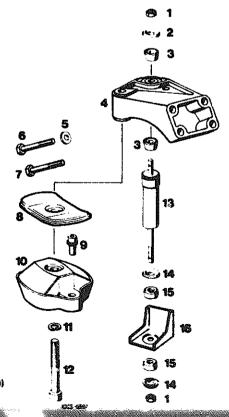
241 07 12 (30 Ø) Rubber buffer 115 241 17 65
